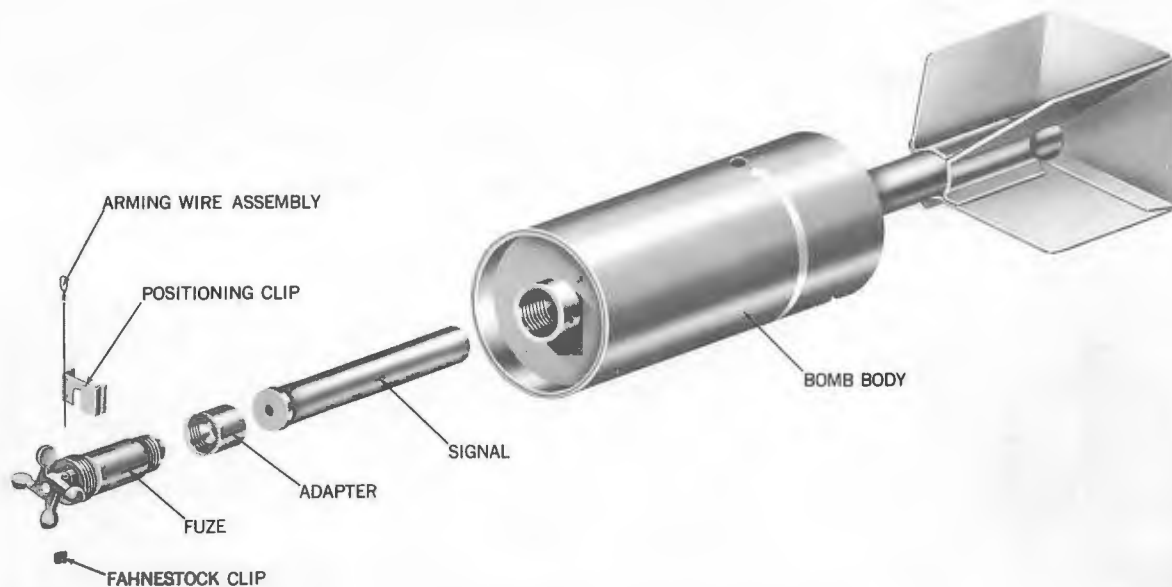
5-lb Practice Bomb Mk 106 Mod 0, Exploded View.
